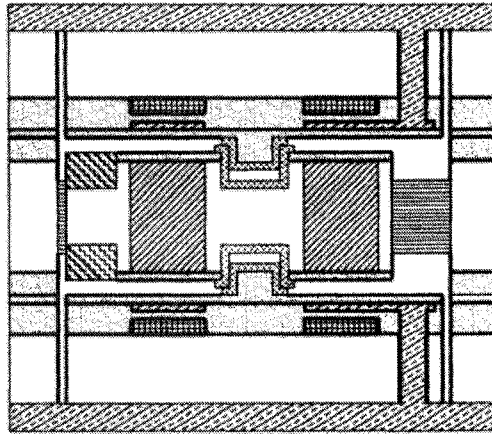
Assembly & Encapsulation step 2 – Assembly and bonding
